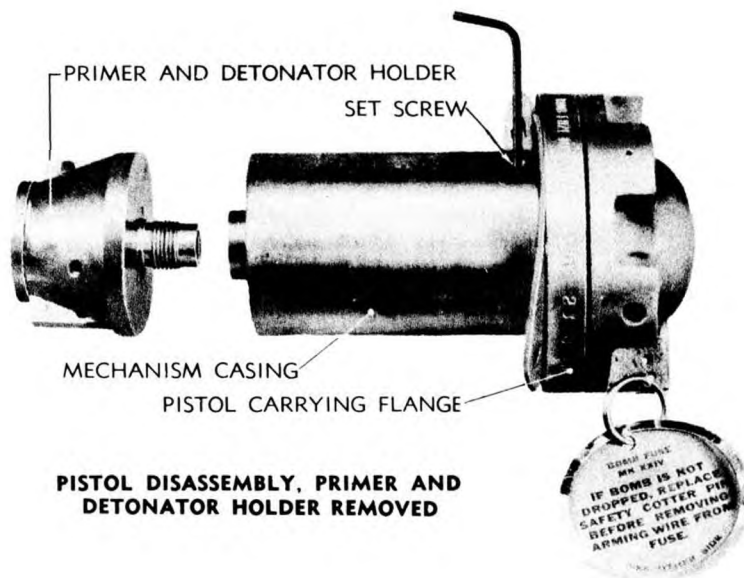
FUZE, BOMB, HYDROSTATIC, AN-MK. 224 — DISASSEMBLY OF PISTOL FOR INSERTION OF AUXILIARY DEPTH SPRING
